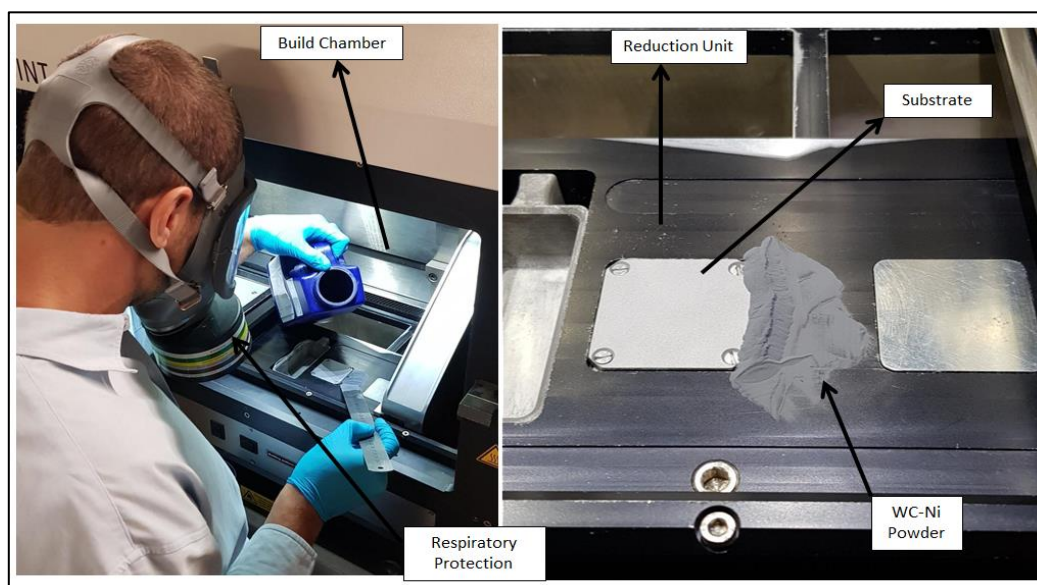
EOSINT M280 MACHINE SETUP.
